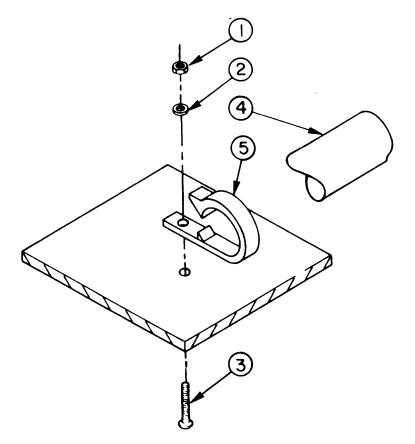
Control Box Assembly, Wire Harness/Cable, Clamp
